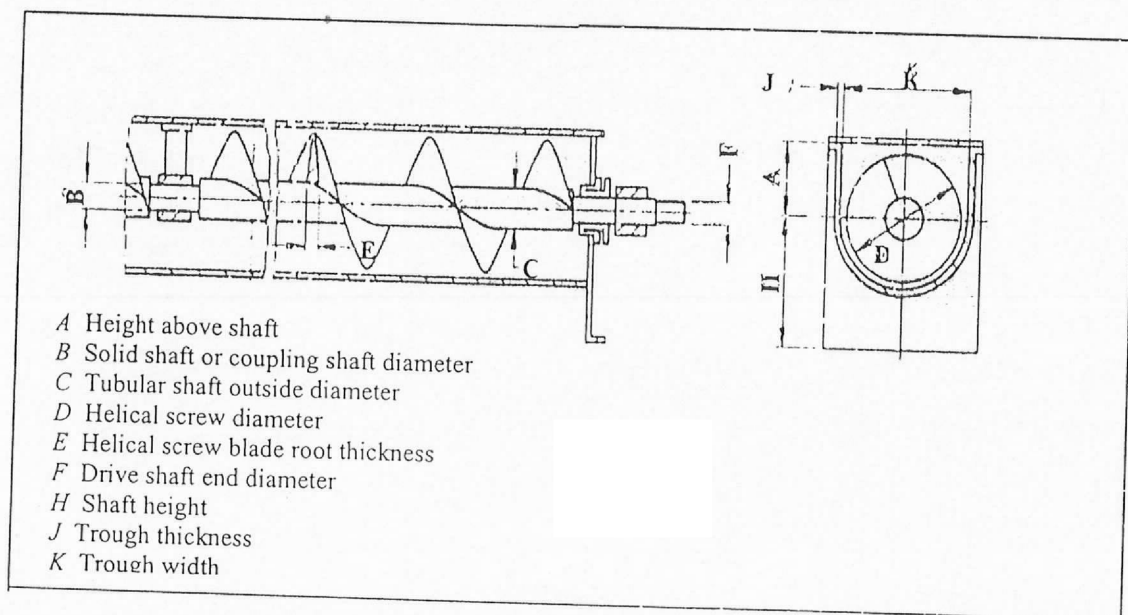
Principle dimension of a screw conveyor/feeder (fixed trough type)
